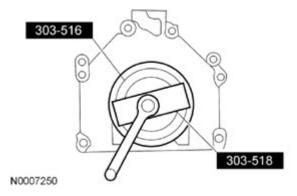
Removing Crankshaft Rear Seal Using Special Tools Courtesy of FORD MOTOR CO.
